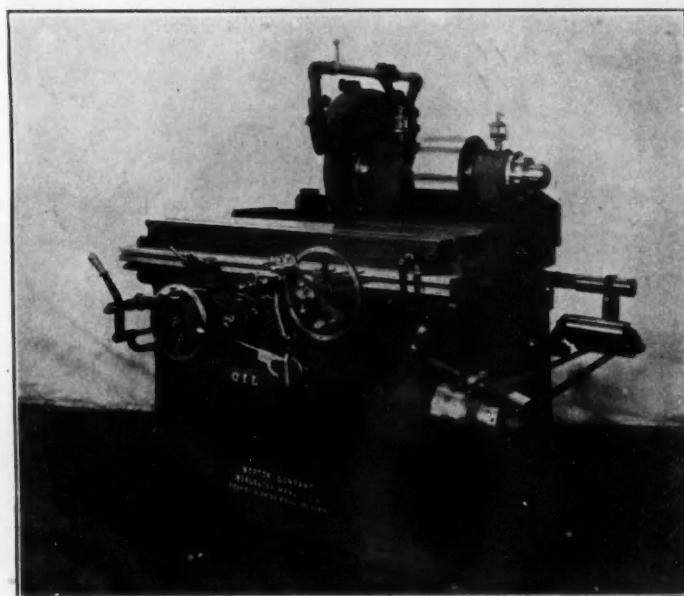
A RECENTLY DEVELOPED FLAT-TABLE MACHINE HAVING A SWIVEL TABLE
